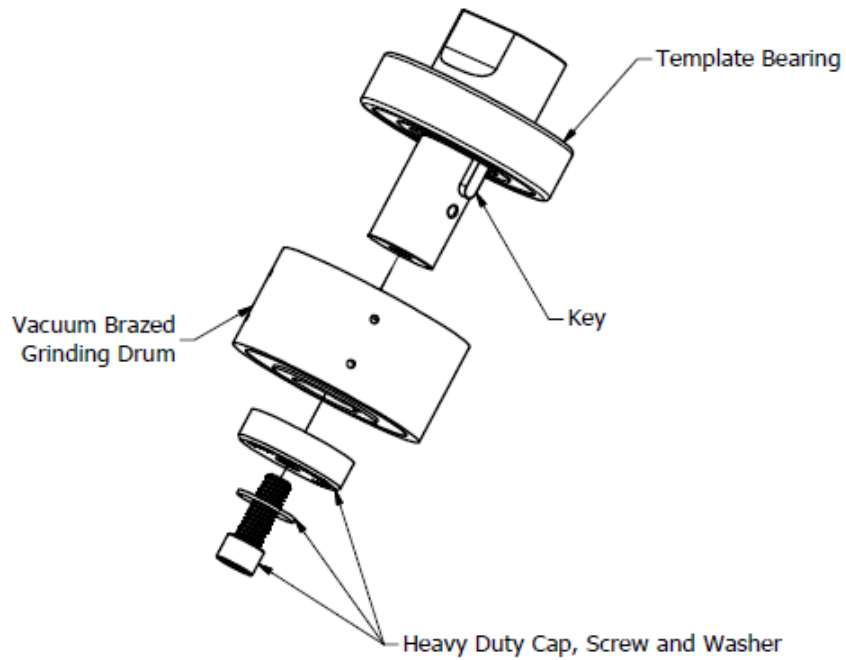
3" Rapid Z™-DRUM with Template Bearing (Exploded)
